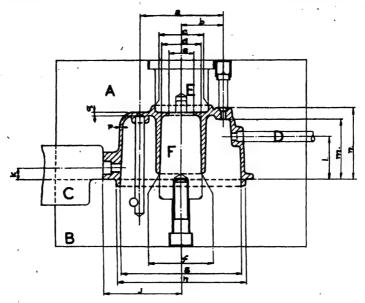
Diagram Illustrating Section through Typical Pressure Die Casting
